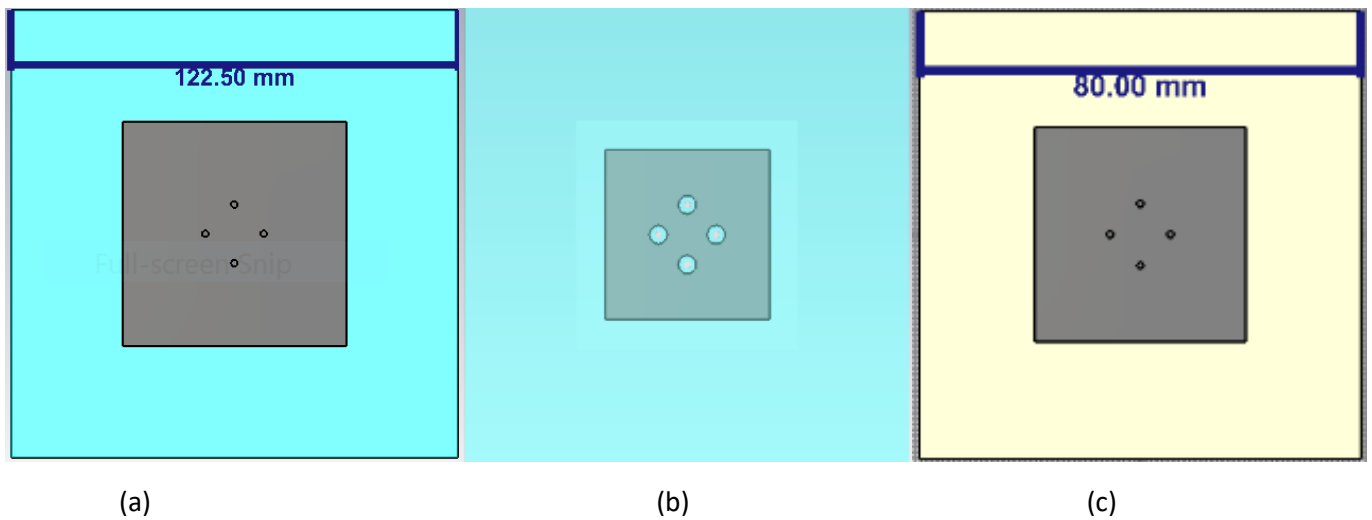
Stacked technique where the bottom is square, (a) front view for 122 mm, (b) bottom view, (c) front view for 80 mm.
